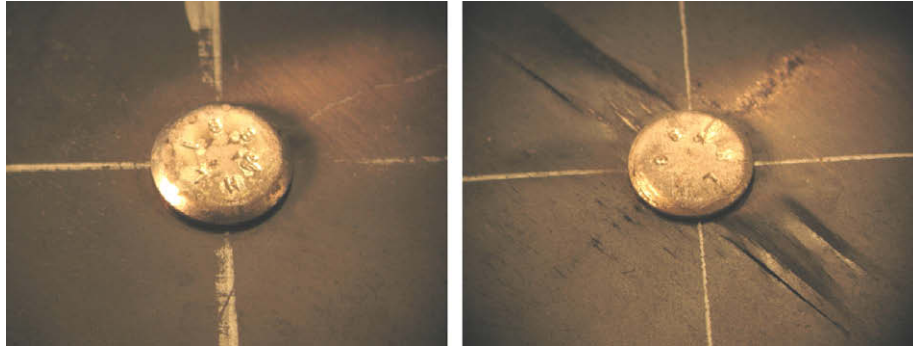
Close-up of top surface fastener and laminate damage for filled-hole specimen at 10 and 30 kA.
